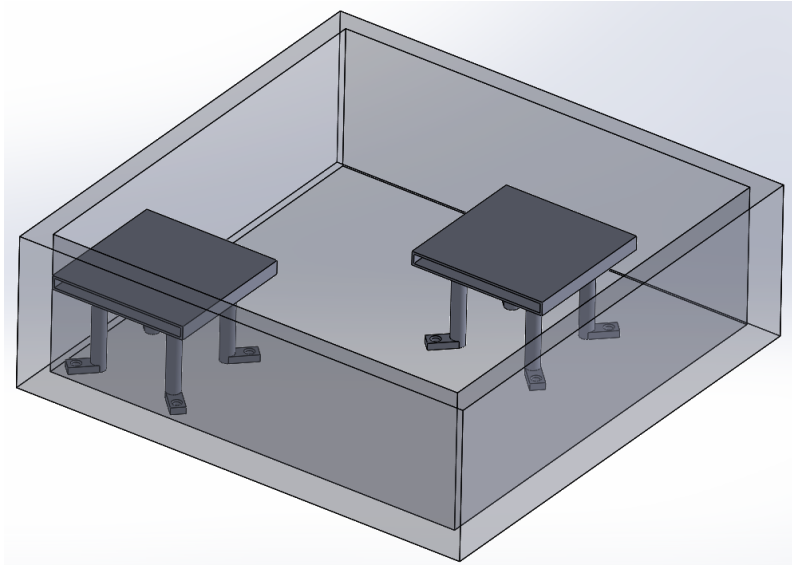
POSITION OF THE 3D PRINTED PIECES INSIDE THE MOULD IN *SOLIDWORKS
